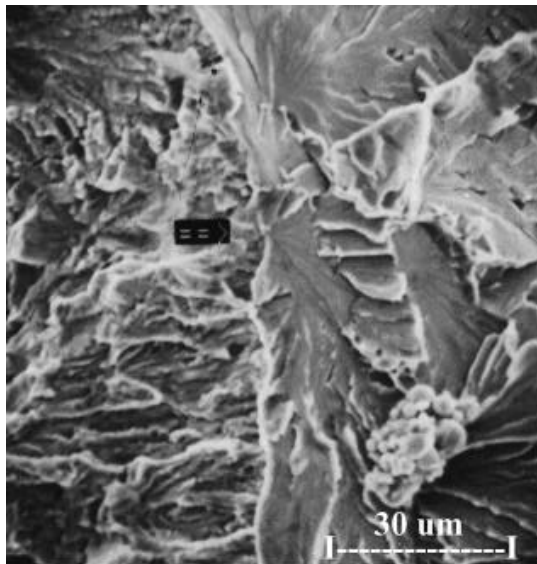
Fracture surface of a three-point bend specimen at -196°C .
